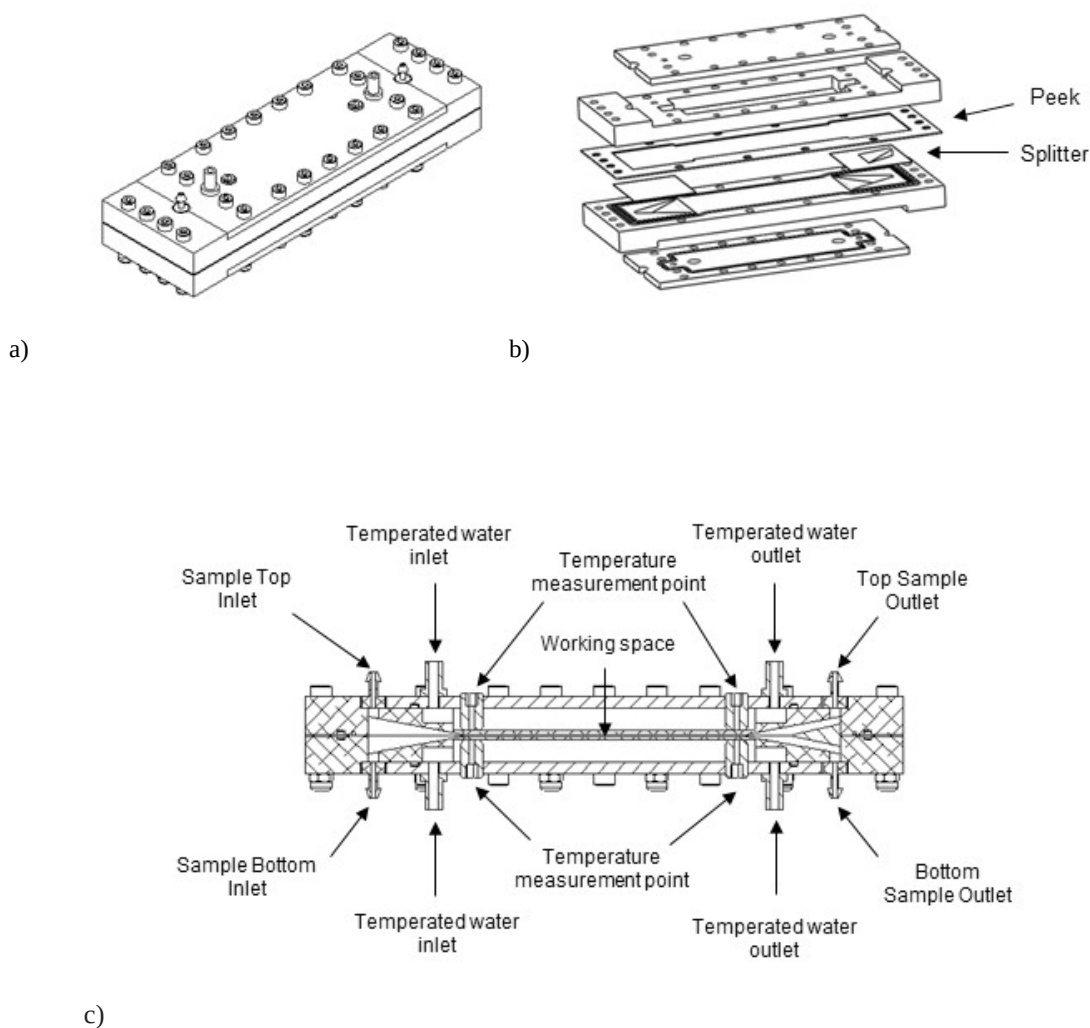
Design of the experimental device a) assembled device b) device exploded c) central cut of the device
